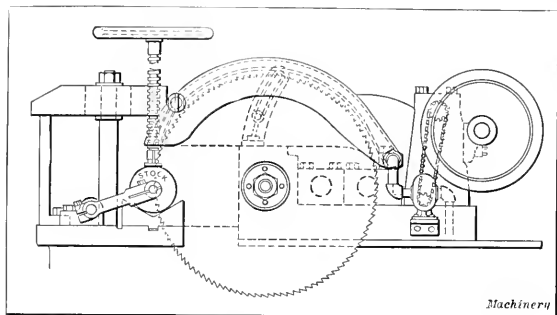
Nutter & Barnes 6-inch Cutting-off Machine equipped with Stock Feed Attachment
